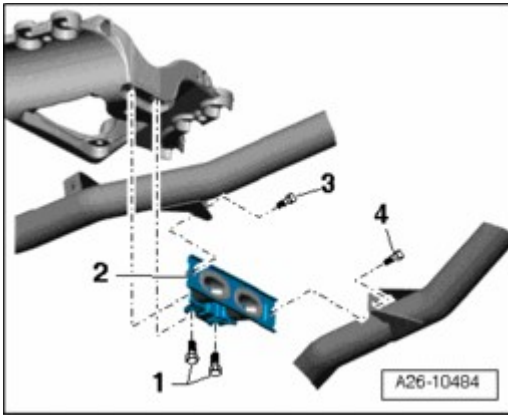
Individual Components Of Center Bracket Mounting For Front Muffler
